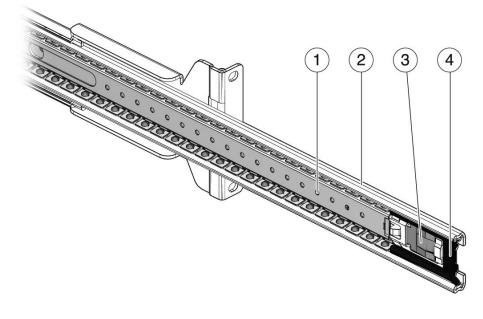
Bearing Car in Full Forward Position Inside the Slide Rail
